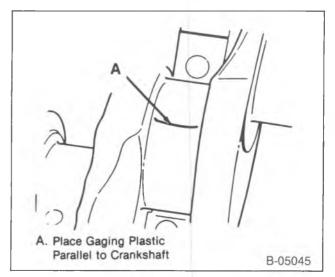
Placing the Gaging Plastic on the Bearing Journal
